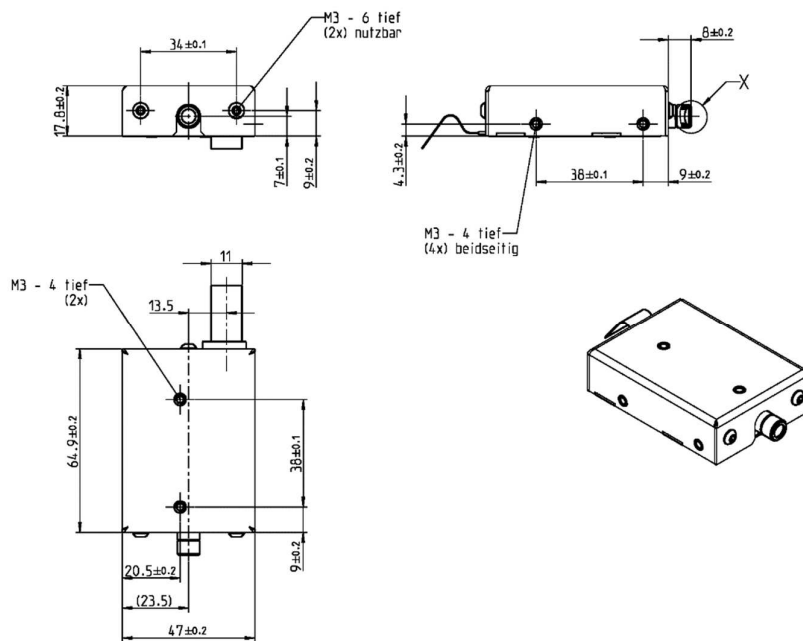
ESMO40-MB-xxxx detector dimensions (front side optical output)
